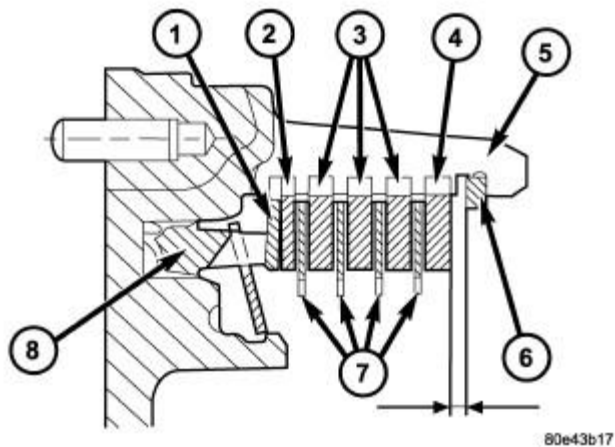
B1 Clutch Stack-up - Double Sided Discs
